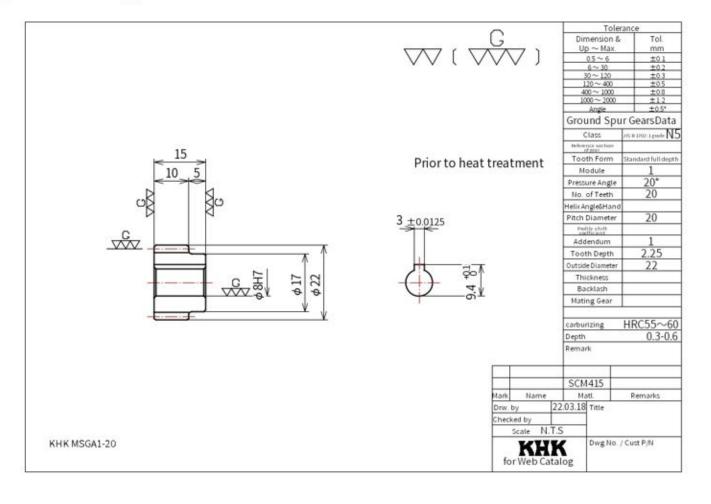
The engineering drawing for the gear connect to gear 4 and gear 3.
